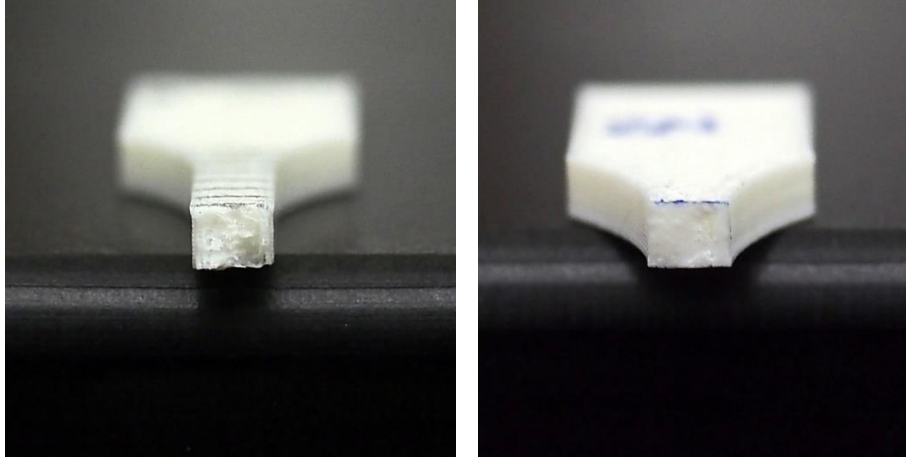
Fractured surfaces of dog-bone specimens after tensile testing
